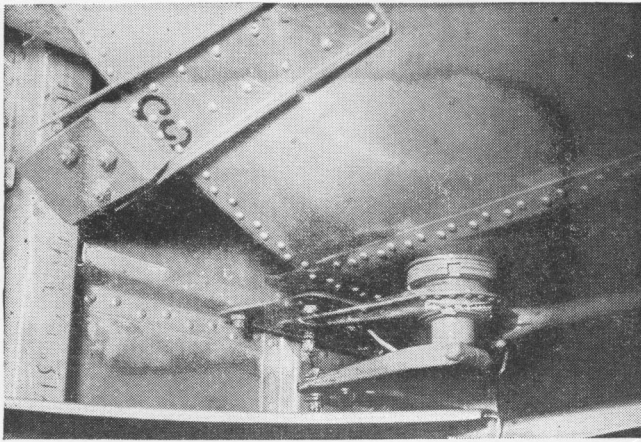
Elevator bell crank and trim tab (unused because the trim tabs were riveted to the elevators) over the auxiliary spar attached to the bottom of the cylindrical cockpit liner.
